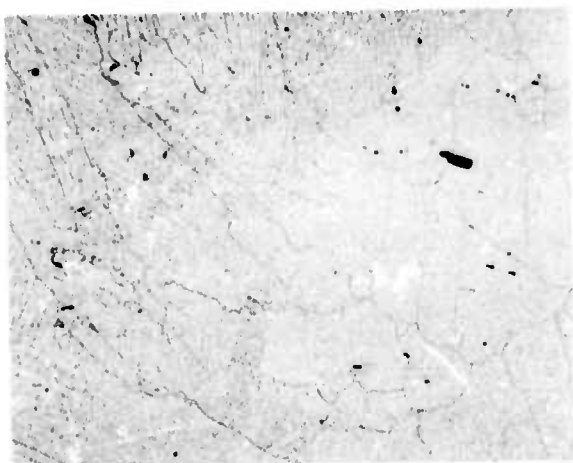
Photographs of SMA weld radiographs
